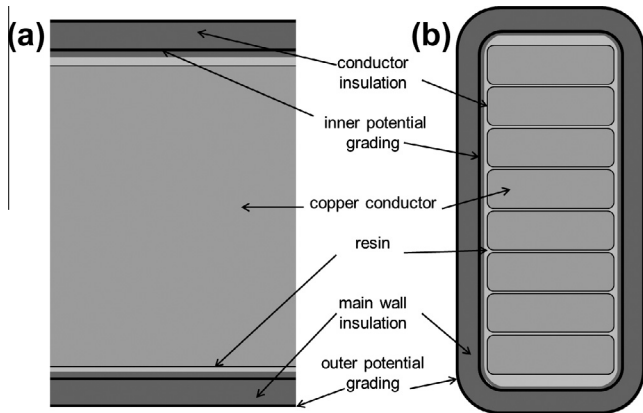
Design of a stator bar used in high voltage rotating machines (a) axial cross-section (b) lateral cut.
